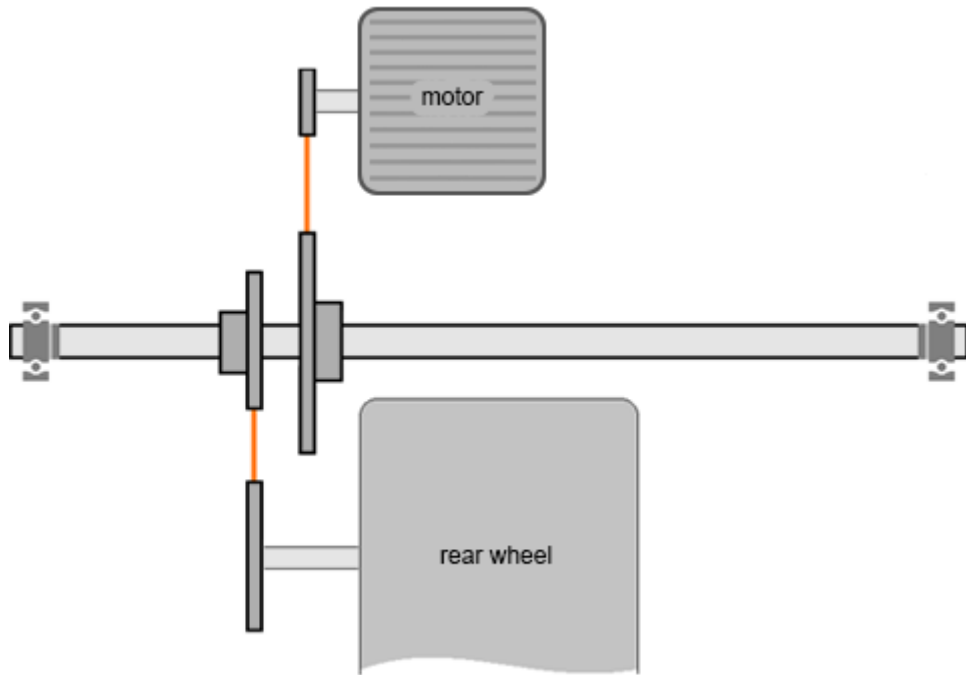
Top-down view of the jackshaft assembly. Not to scale.
